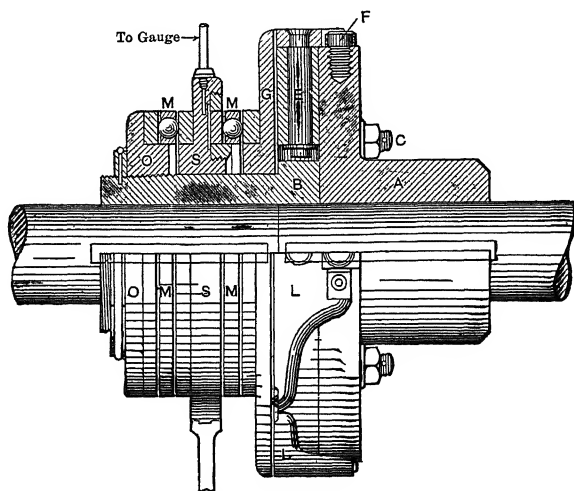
KENERSON TORSION DYNAMOMETER.
